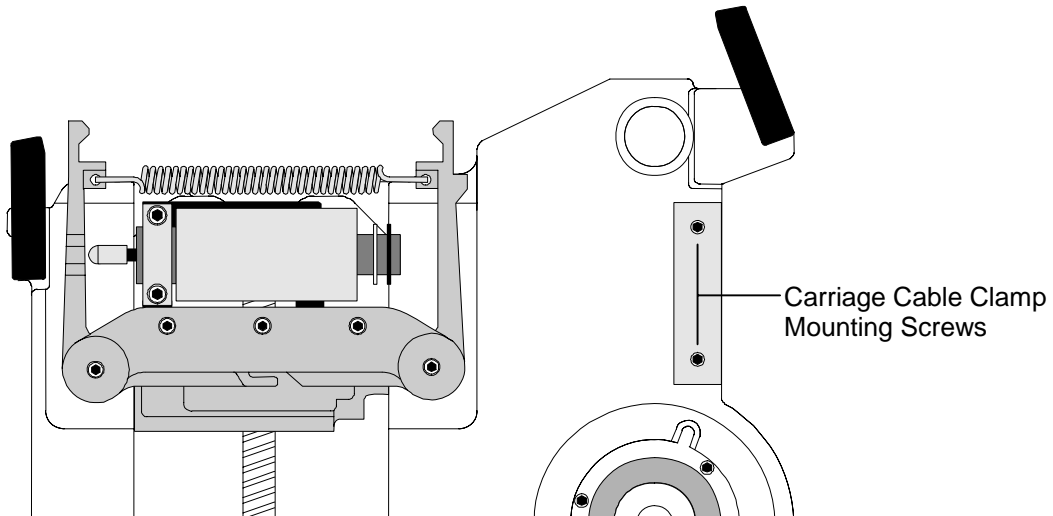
The Carriage Assembly – TLS-412180/360 Model Top View Shown
